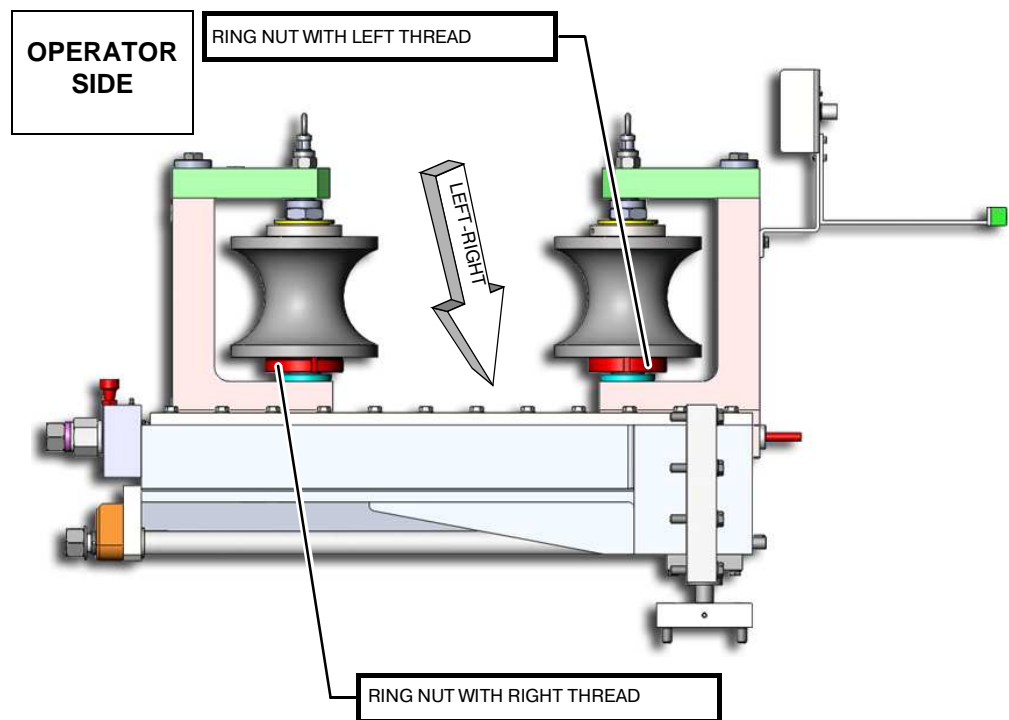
K Assembly scheme of roll locking ring nuts according to line work direction
